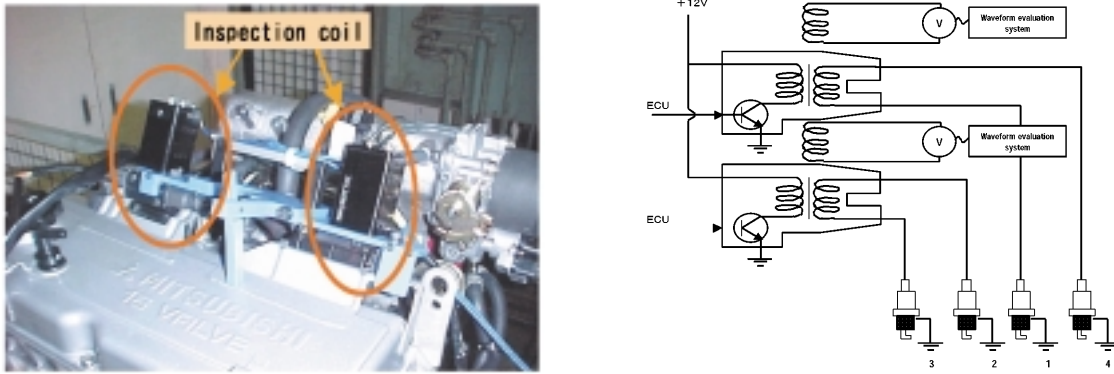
Ignition system inspection coils applied to 4G9 engine
